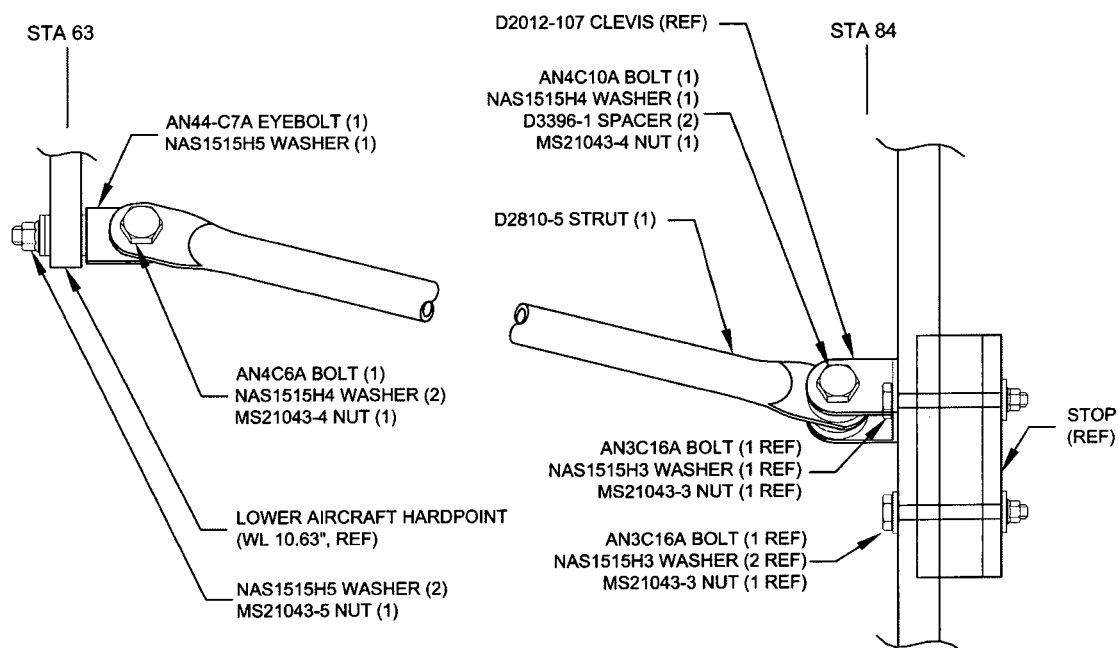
STA 84.29 for D412-630-023/-024 Heli-Access-Step™ Installation
